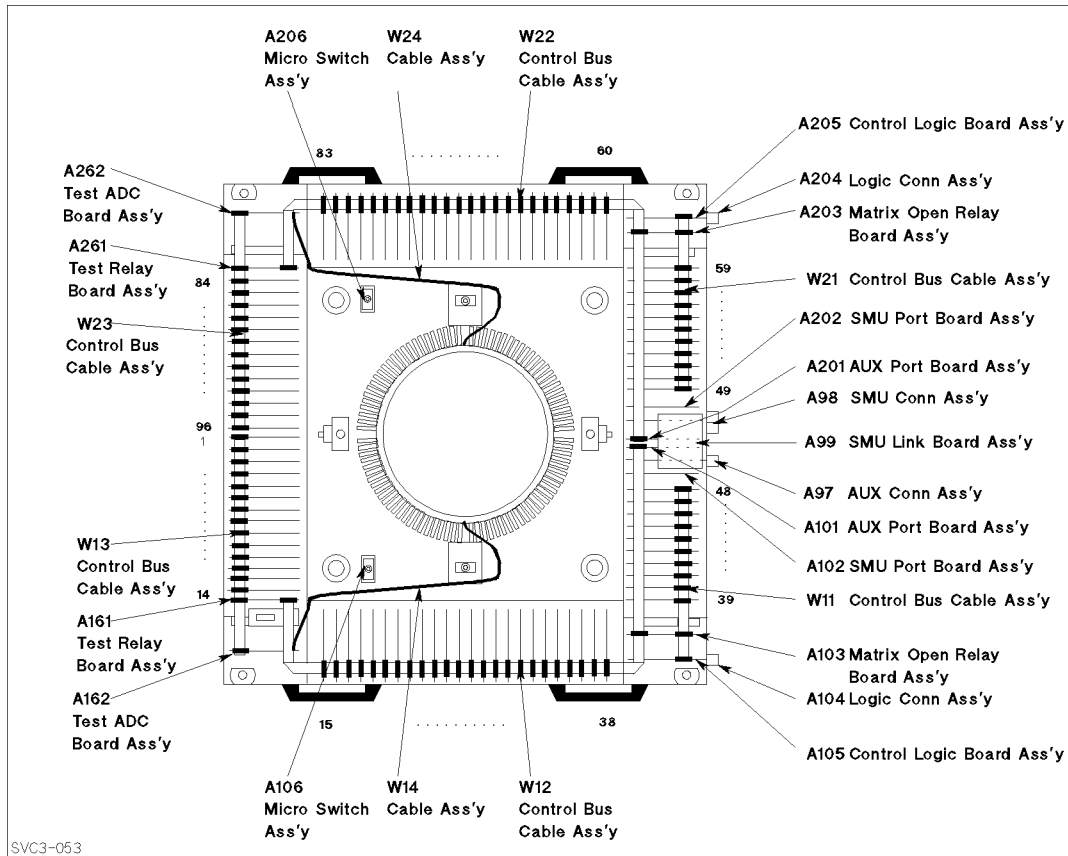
Assembly Locations in the HP 4089A/B 96-pin SWM
